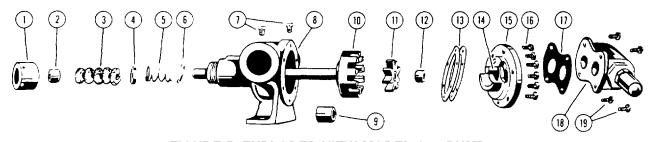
EXPLODED VIEW MODEL G32 PUMP
